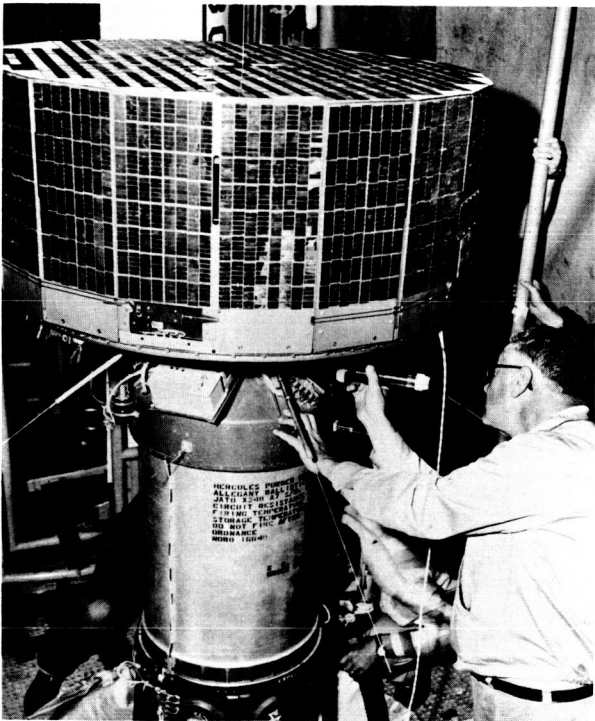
Mechanical alignment check of the third stage and satellite assembly.
